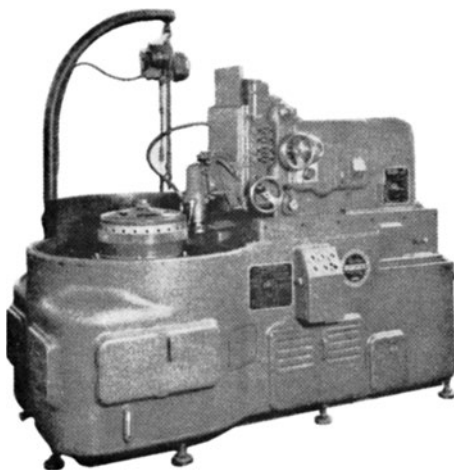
A rotary gear shaver for finishing medium-sized internal and external gears. (Courtesy of National Broach and Machine Co., a division of Lear Siegler, Detroit, Michigan.)
